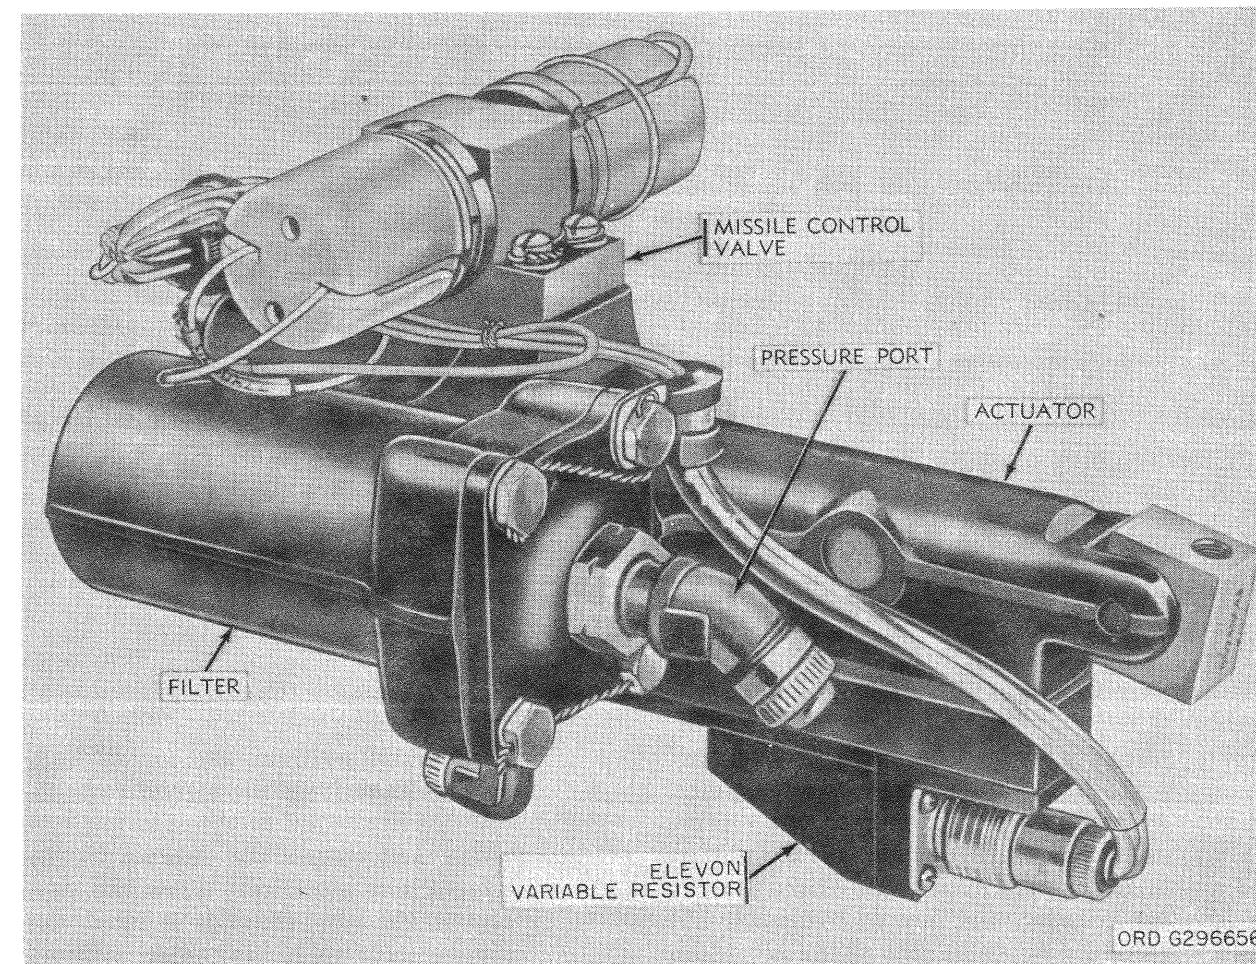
(U). P, Y, or roll actuator assembly (U).
